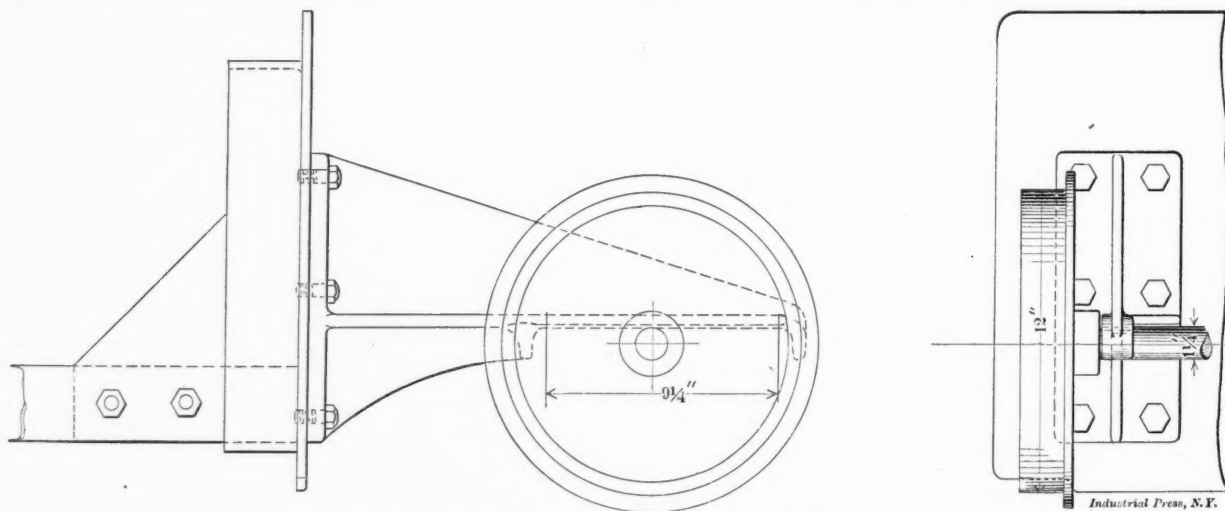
Another Form of "Rolling Bearing" for use on Drawers.
